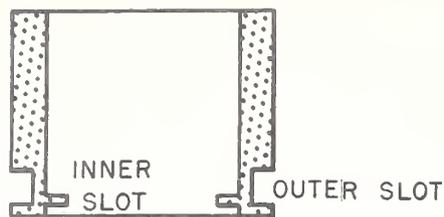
Probe coil form used in oil-film thickness indicator.
